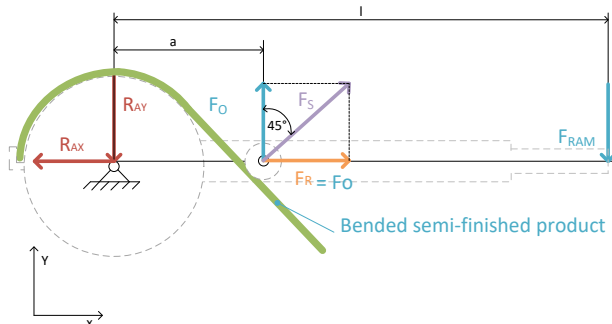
Two support beam loaded by forces F_{RAM} and F_S
